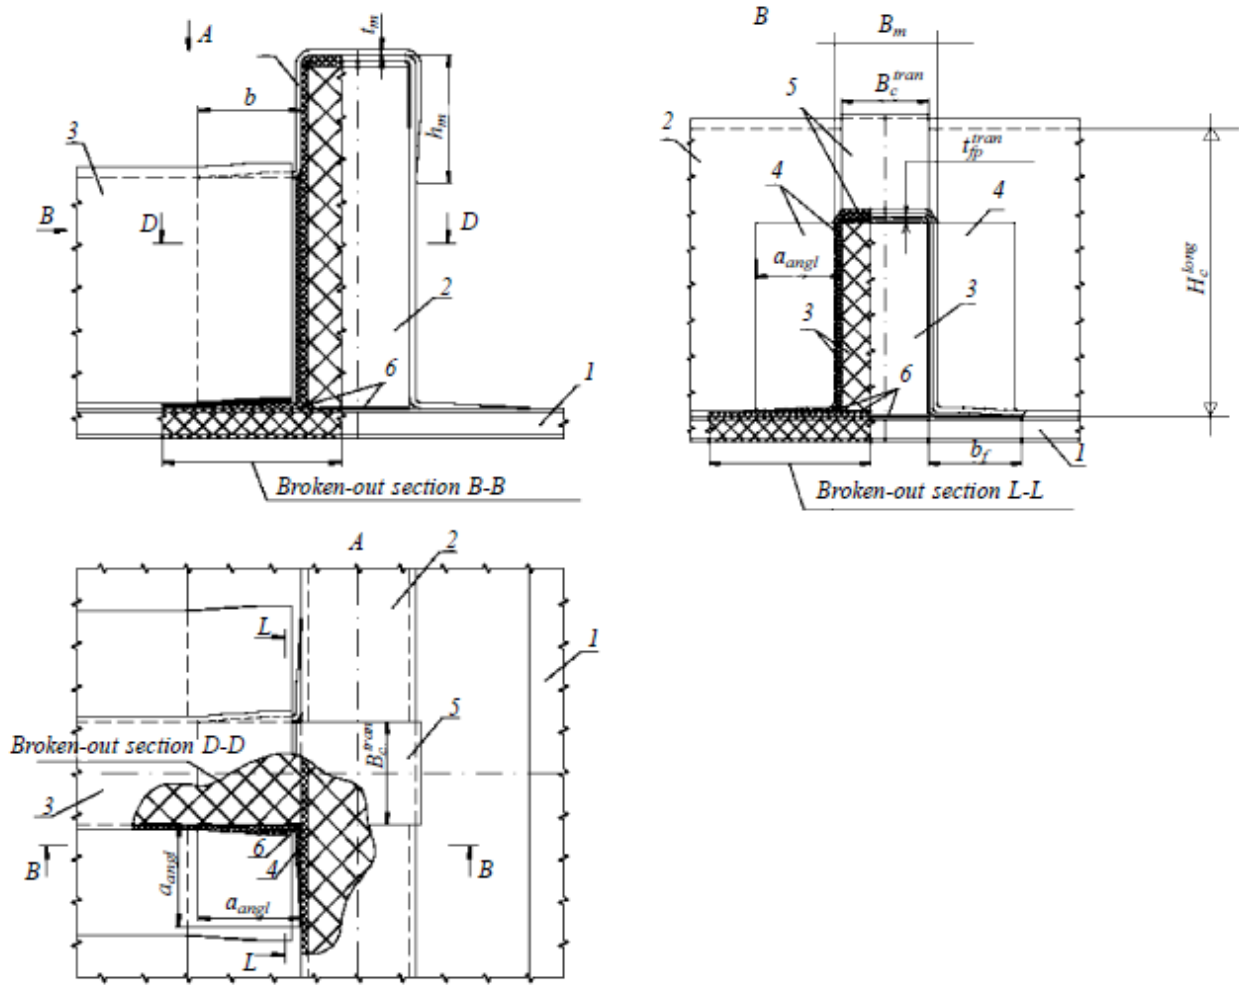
Termination and joint of the transverse to the longitudinal:
